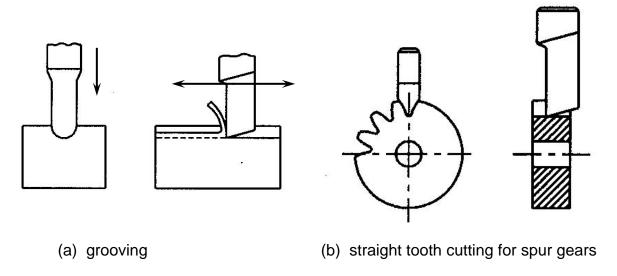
Making grooves and gear teeth cutting in shaping machine by form tools.
